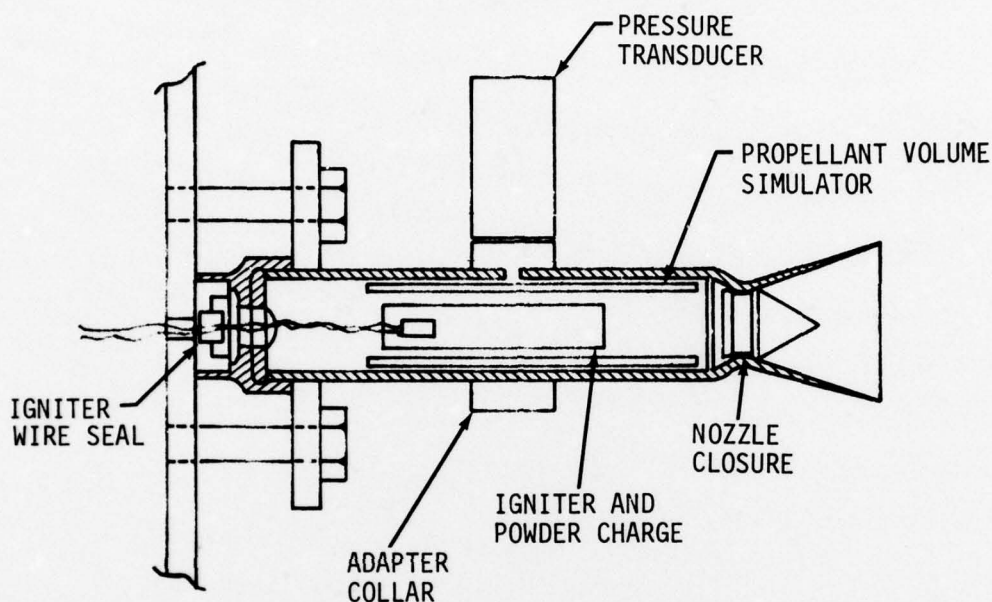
NOZZLE CLOSURE RELEASE PRESSURE TEST FIXTURE
